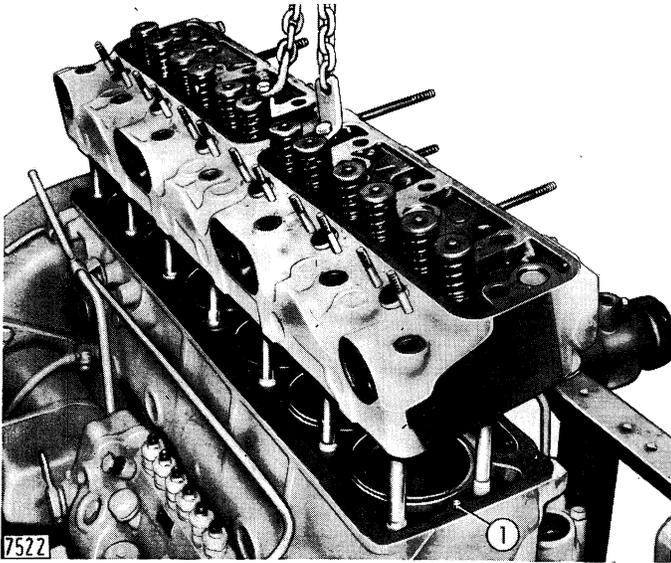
Removing (or Refitting) the Cylinder Head with the Engine on the Rotary Stand
